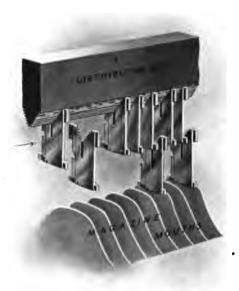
Linotype; quadruple magazine machine; model 9; English and American. To face plate LXVI.]
